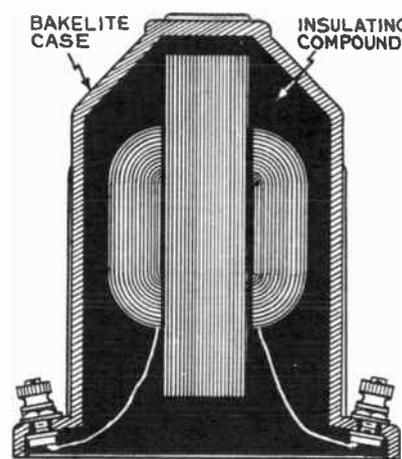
Line drawing of Pilot moisture proof transformer showing that the entire core and coil assembly is hermetically sealed in the bakelite case.
